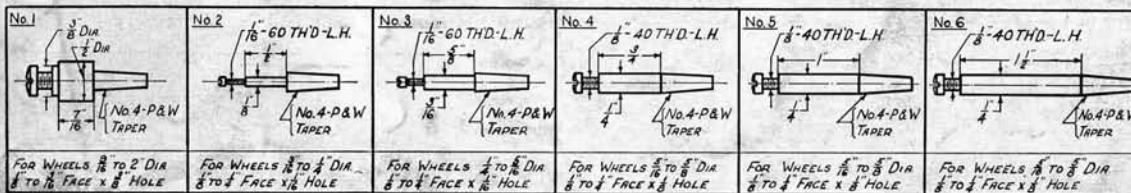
Grinding Wheel Arbors. Fit internal grinding attachment spindle (Fig. 6).
